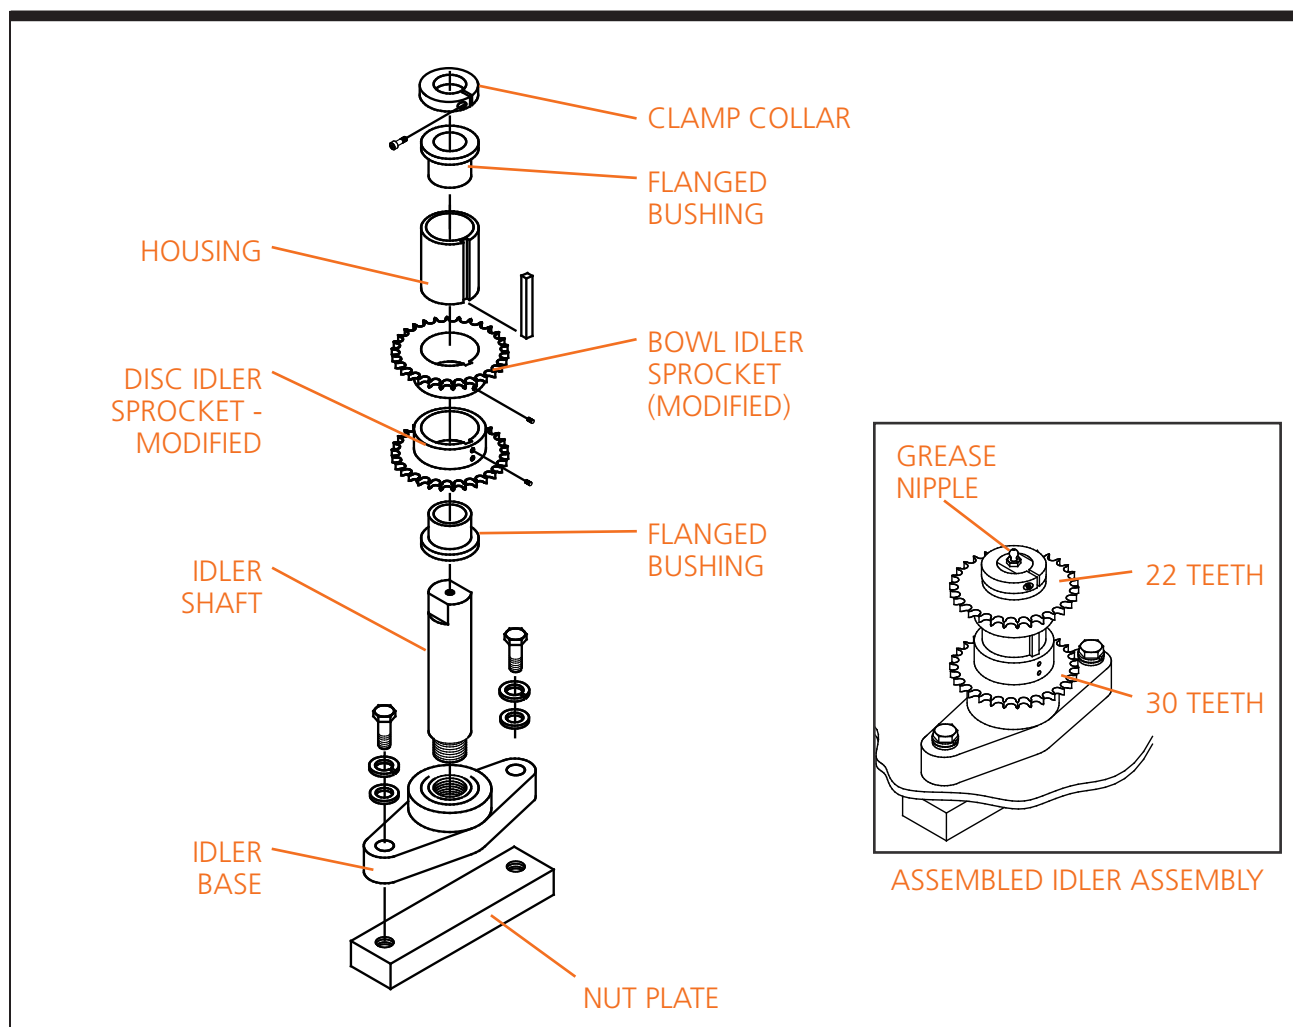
Idler Assembly [Single Drive Systems] - Exploded View and Assembled View
